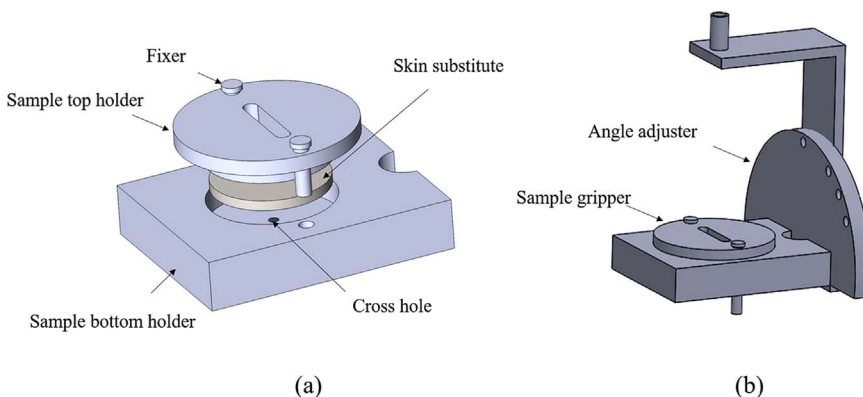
Friction penetration apparatus. (a) sample gripper, (b) assemble part.
